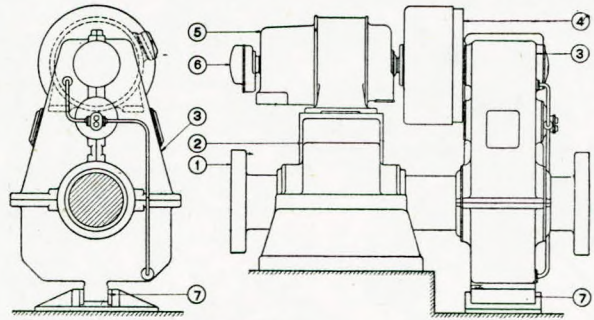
Propeller-shaft-driven generator with electric slip coupling.
